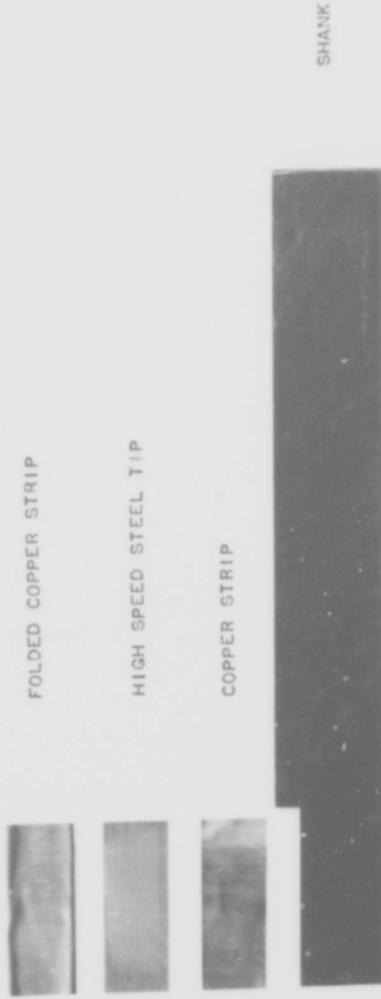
ASSEMBLY FOR COPPER BRAZING OF HIGH SPEED STEEL TIP
